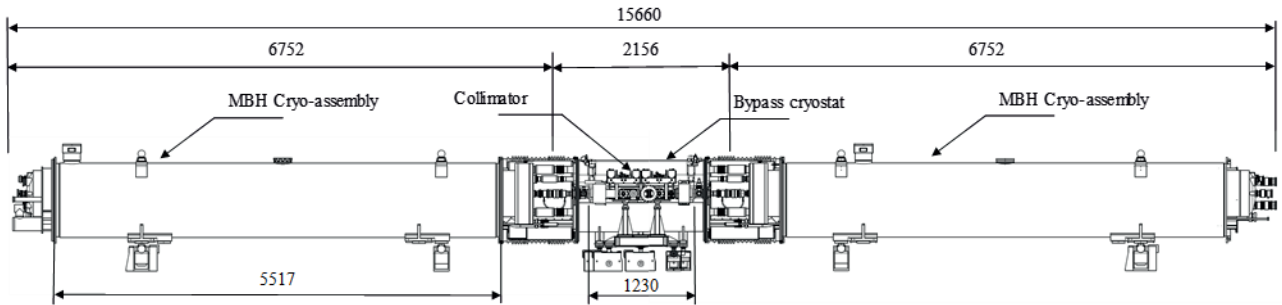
Side view of the 11 T dipole full assembly showing the collimator installed between cold-to-warm transitions.
